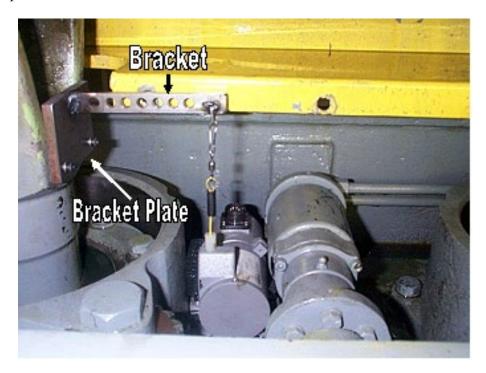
Cable Extension Position Transducer: Mounting Example
